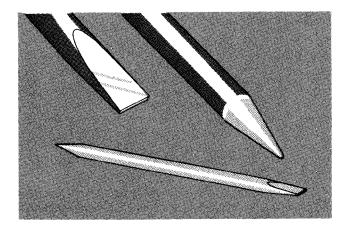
A soldering aid constructed from a 1/4 inch wooden dowel.
